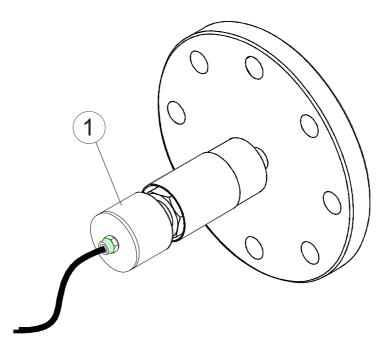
Parts list: VDU with flange process connection, sensor 2 (slave)
